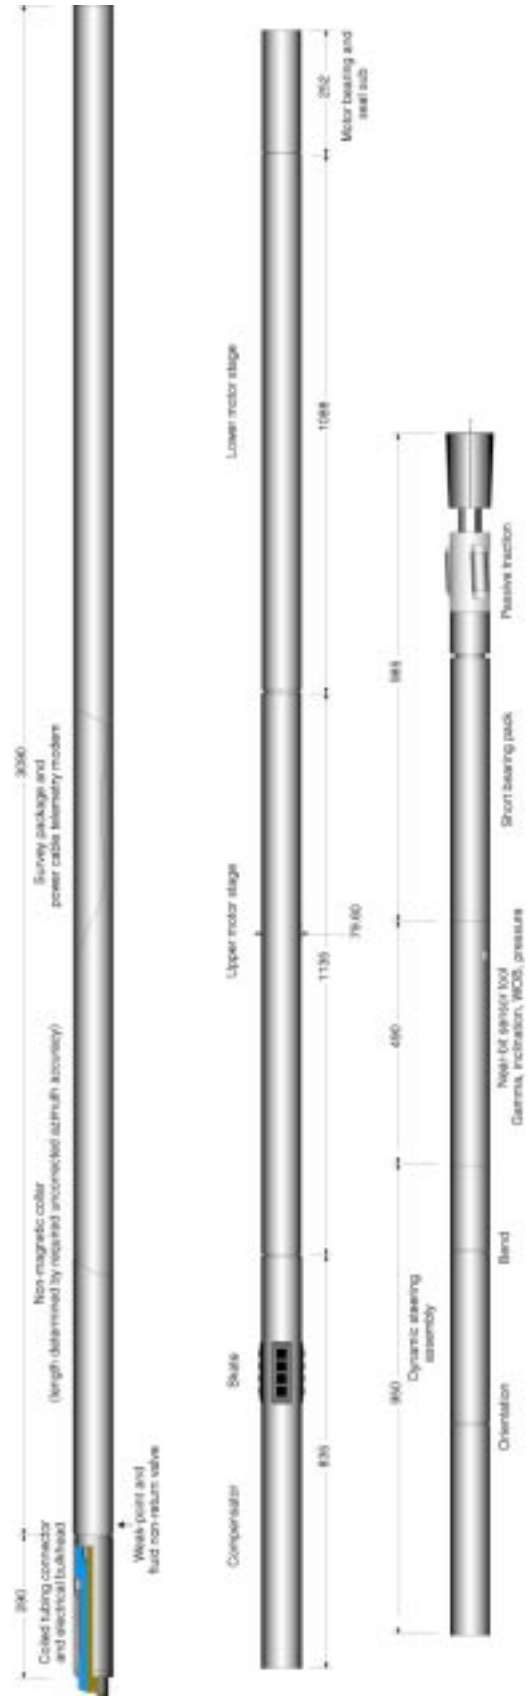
Phase II E-CTD Bottom Hole Assembly
